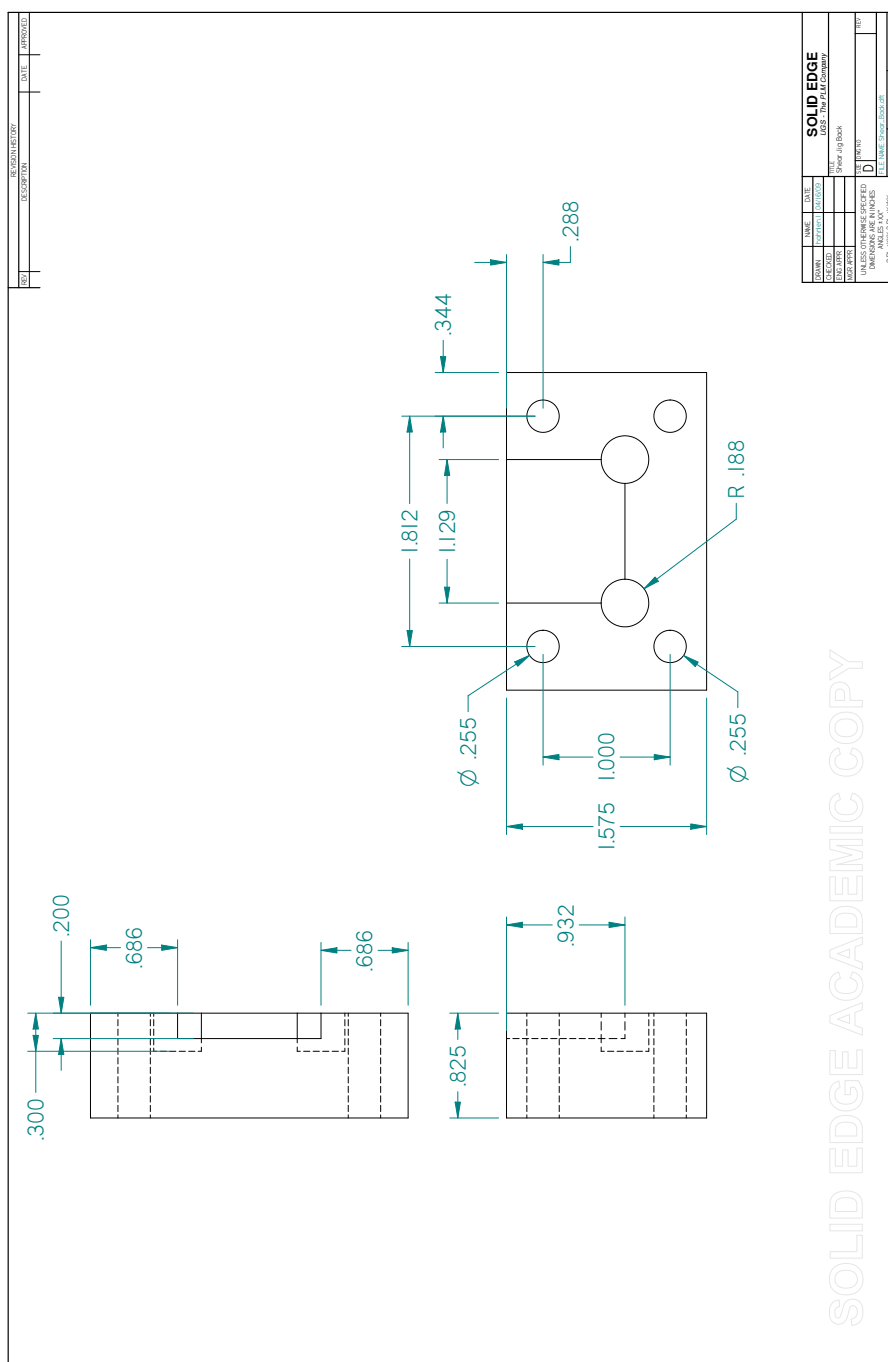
Tensile test bottom grip use for bulk solder and UAM 3-2 tests. All dimensions in inches.
